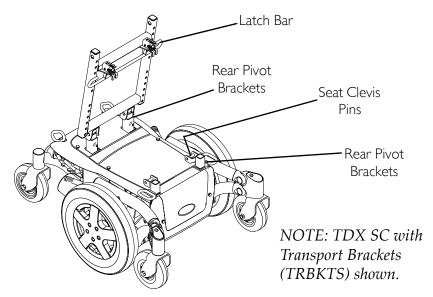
Removing/Installing the Seat Assembly - Wheelchairs with Latch Bars Only
